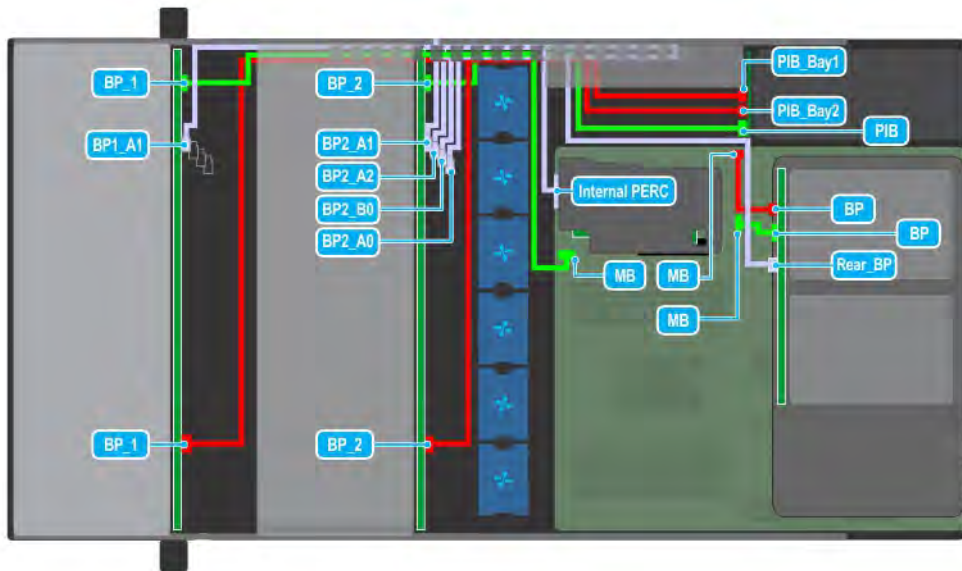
Cable routing - System with 2 x 3.5-inch rear drive backplane connected to cable chain assembly
